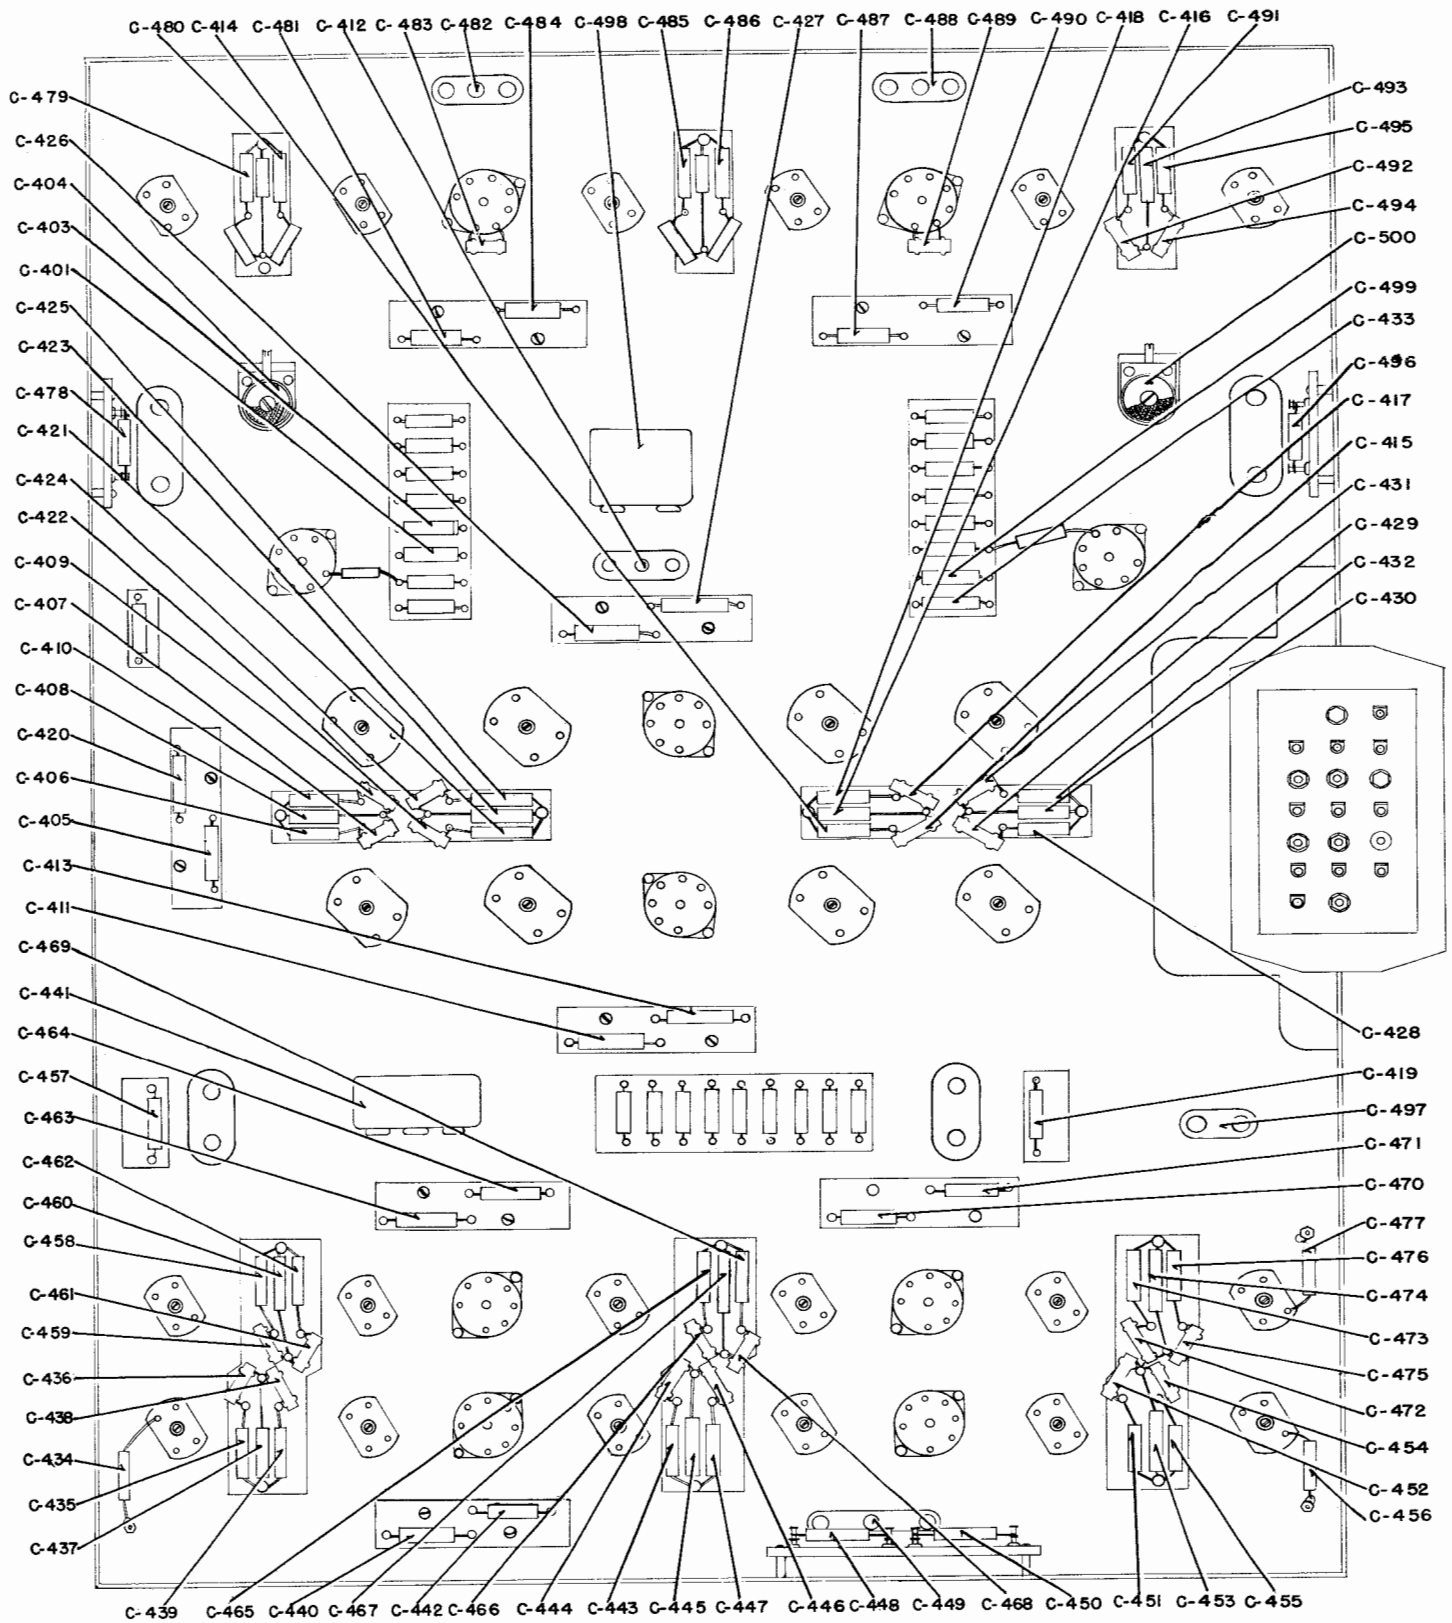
Capacitor Locations Bottom of Chassis, Filter Assembly F-99/FRR-24
